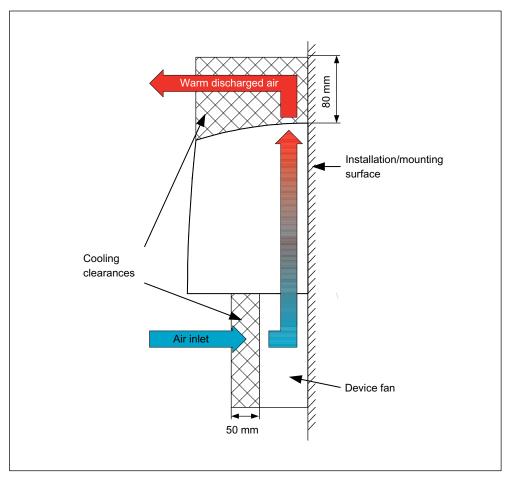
Cooling clearances for 300 mm components with mounted equipment fan
